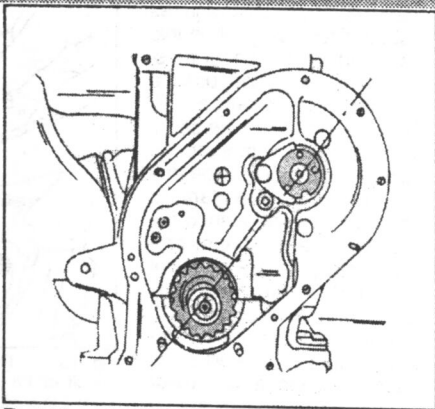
Rotate the crankshaft and the camshaft until the two timing marks are aligned as shown.
